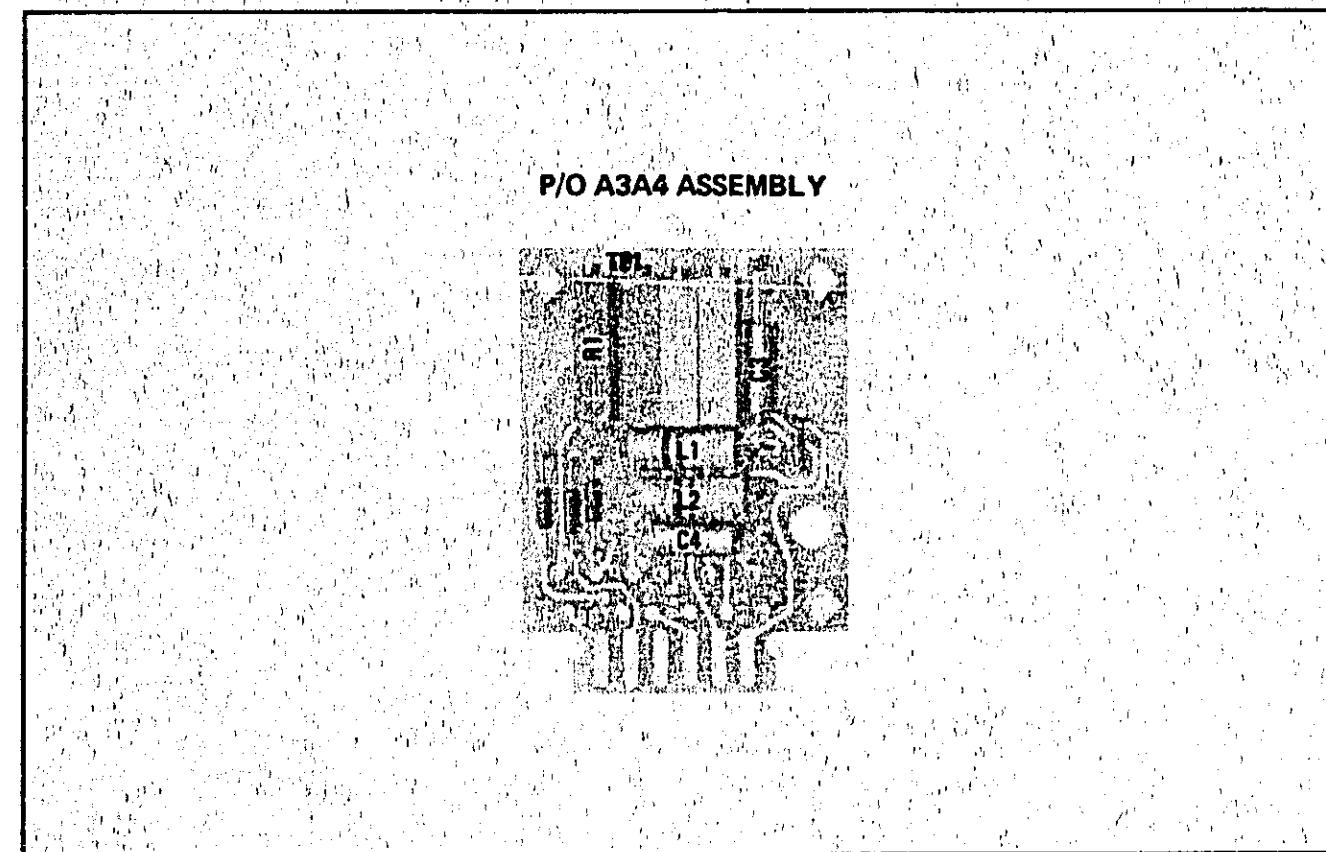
P/O A3A4 Connector Board Assembly Component Locations
